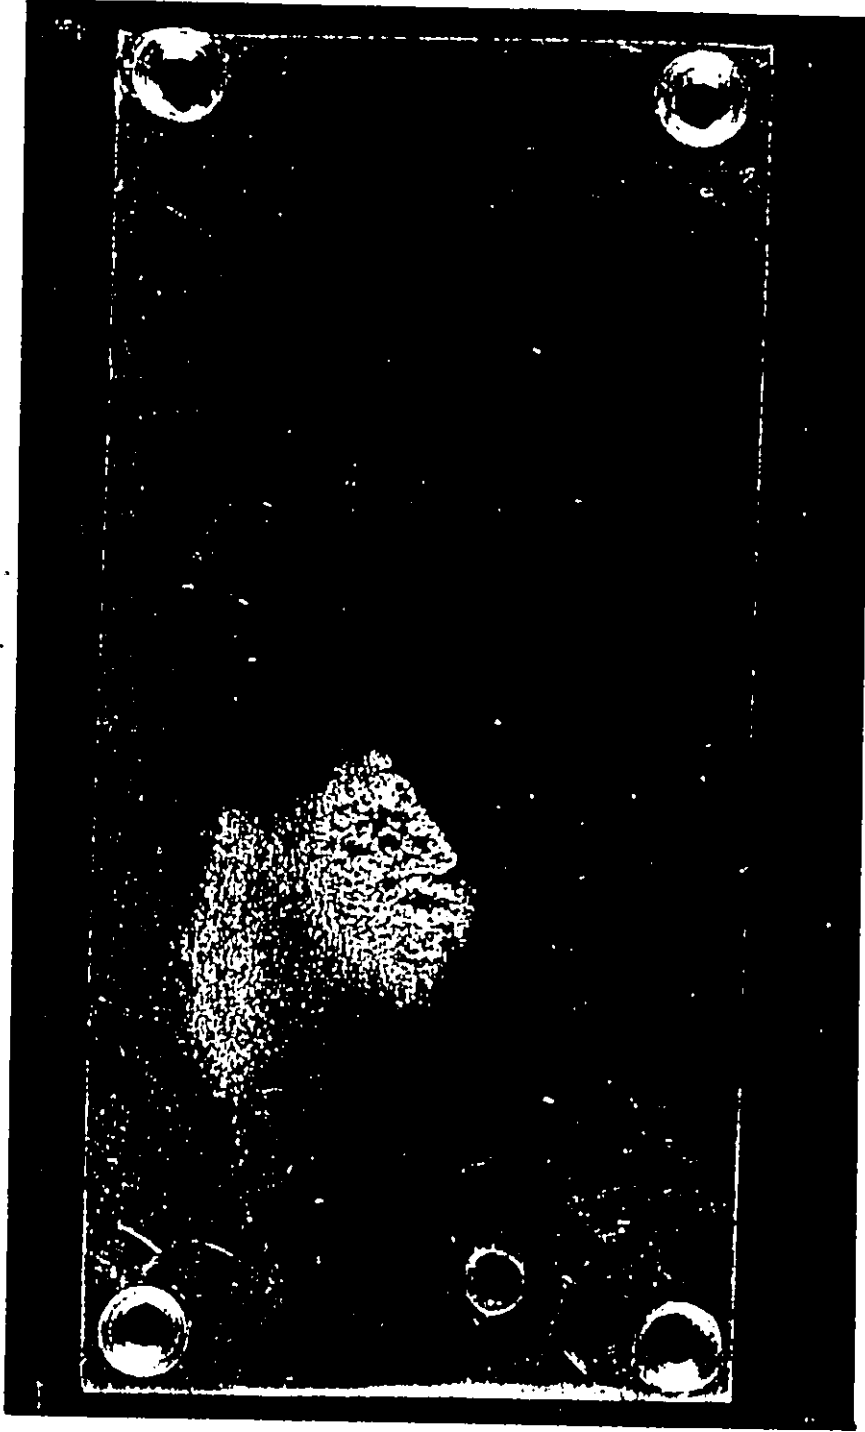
DAMAGED AREA OF TEST SPECIMEN (RUN 262, TABLE 4 P.46)
